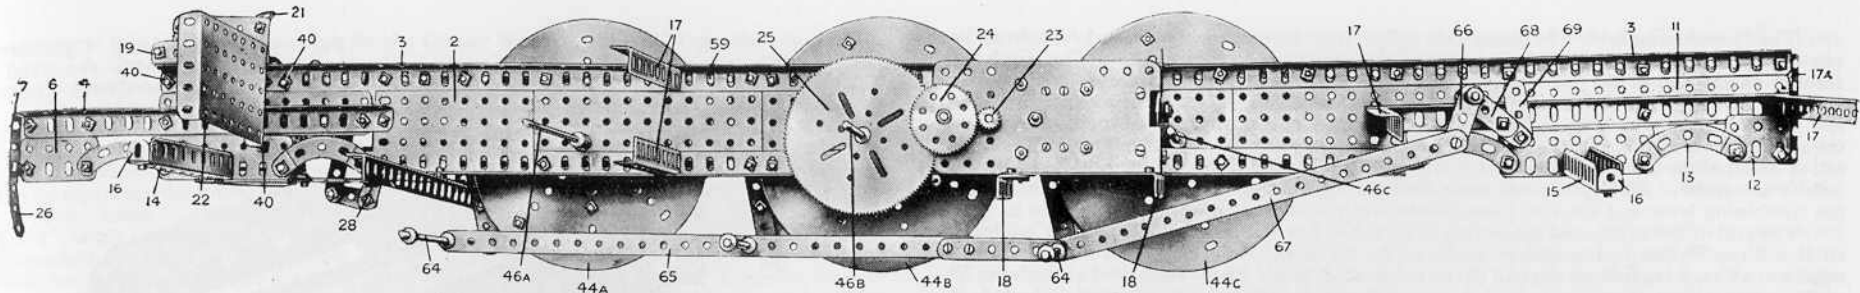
Main Frame, with left-hand side removed to show Motor and Gearing, etc.
